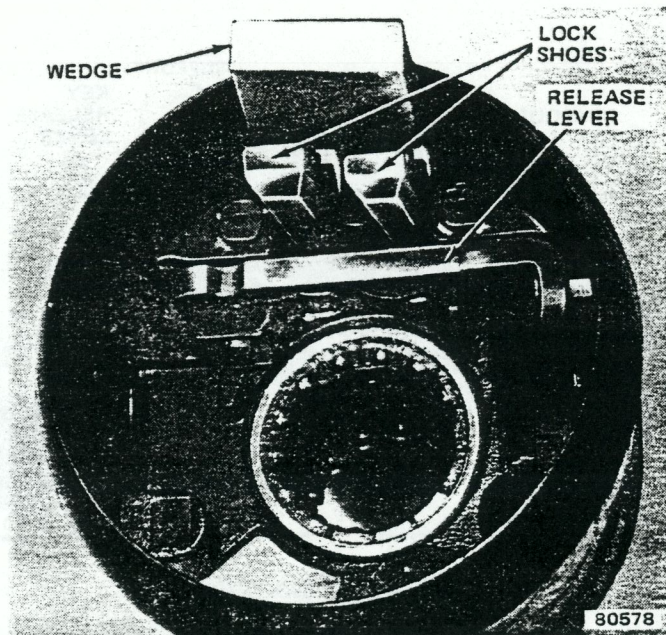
J-57 Relieving Lock Shoe Spring Tension
